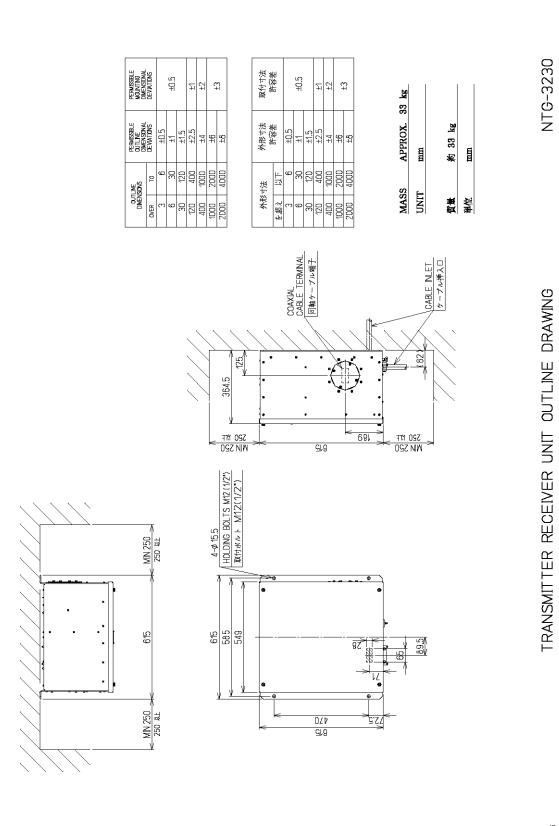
Outline Drawing of Transmitter Receiver Unit, Type NTG-3230
